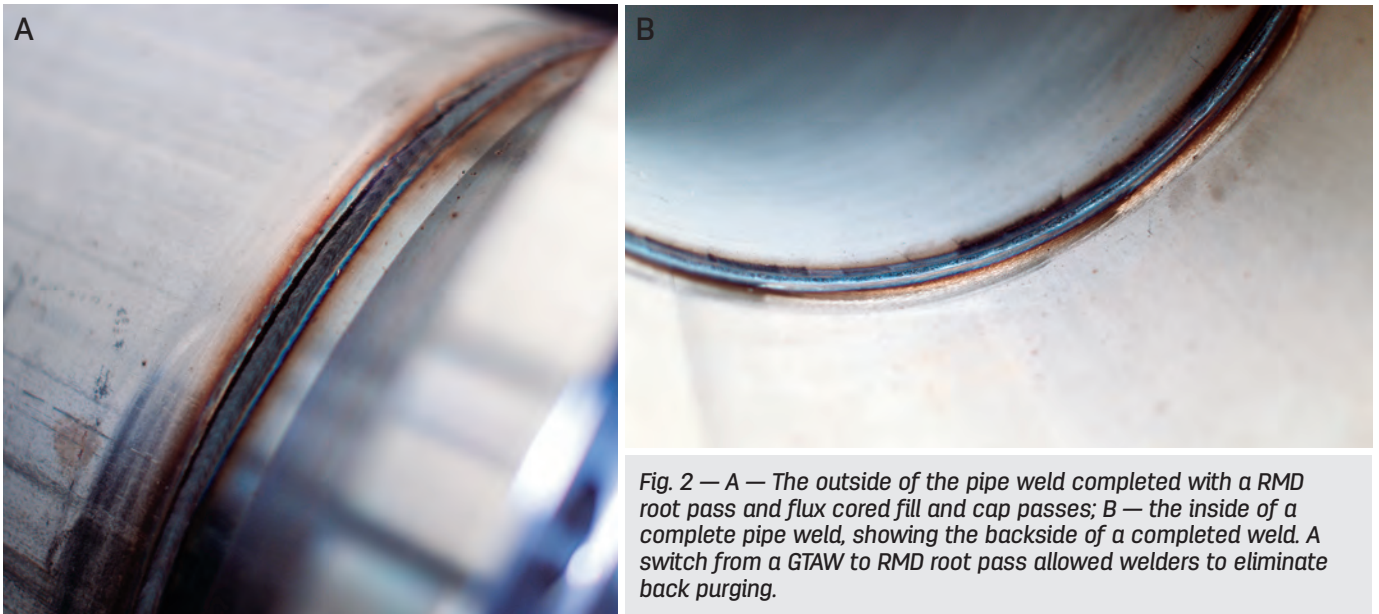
A — The outside of the pipe weld completed with a RMD root pass and flux cored fill and cap passes; B — the inside of a complete pipe weld, showing the backside of a completed weld. A switch from a GTAW to RMD root pass allowed welders to eliminate back purging.
